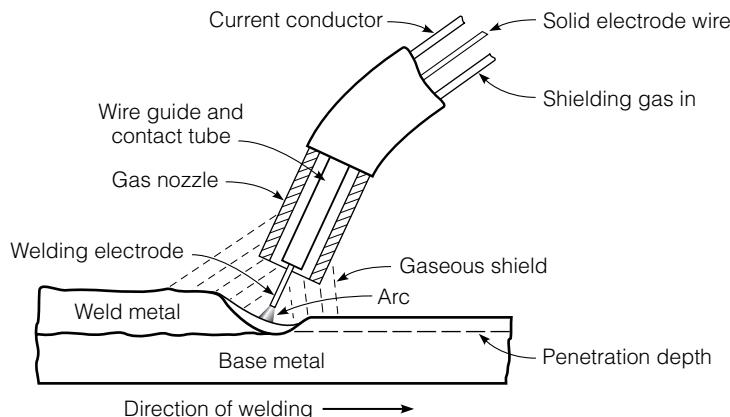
Schematic drawing of gas welding.
